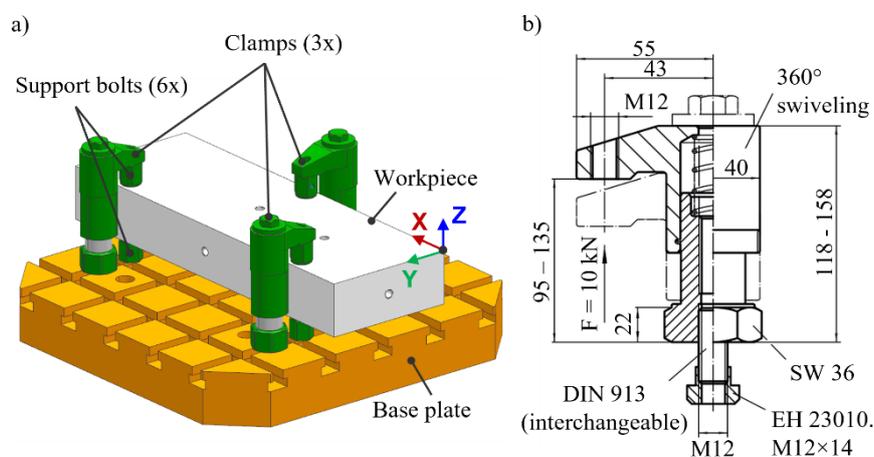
a) Configuration of an exemplary workpiece-fixture system, b) dimensions of a down-thrust clamp
